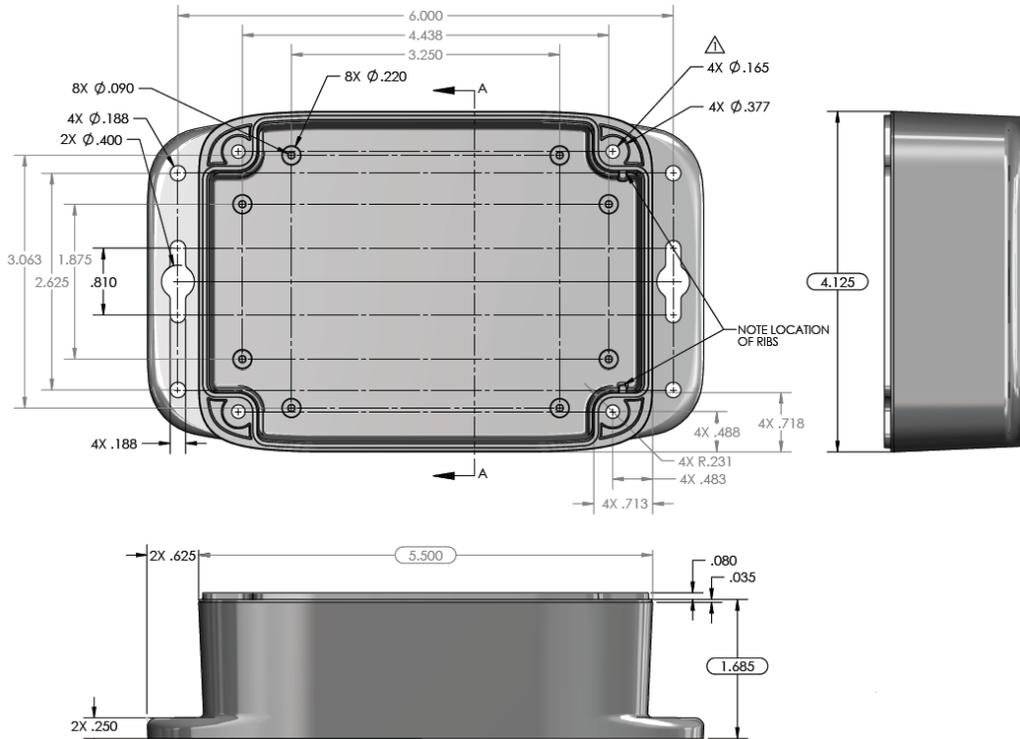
Wireless transceiver dimensions (Type Lite). All dimensions are in inch.
